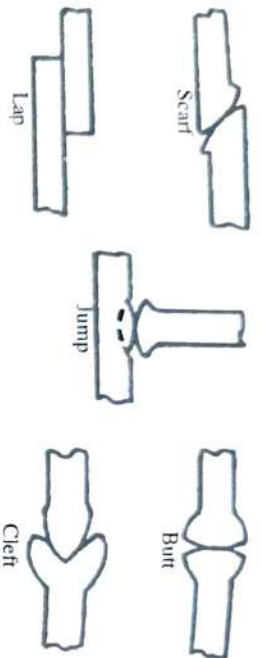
Types of joints used in forge or smith welding
